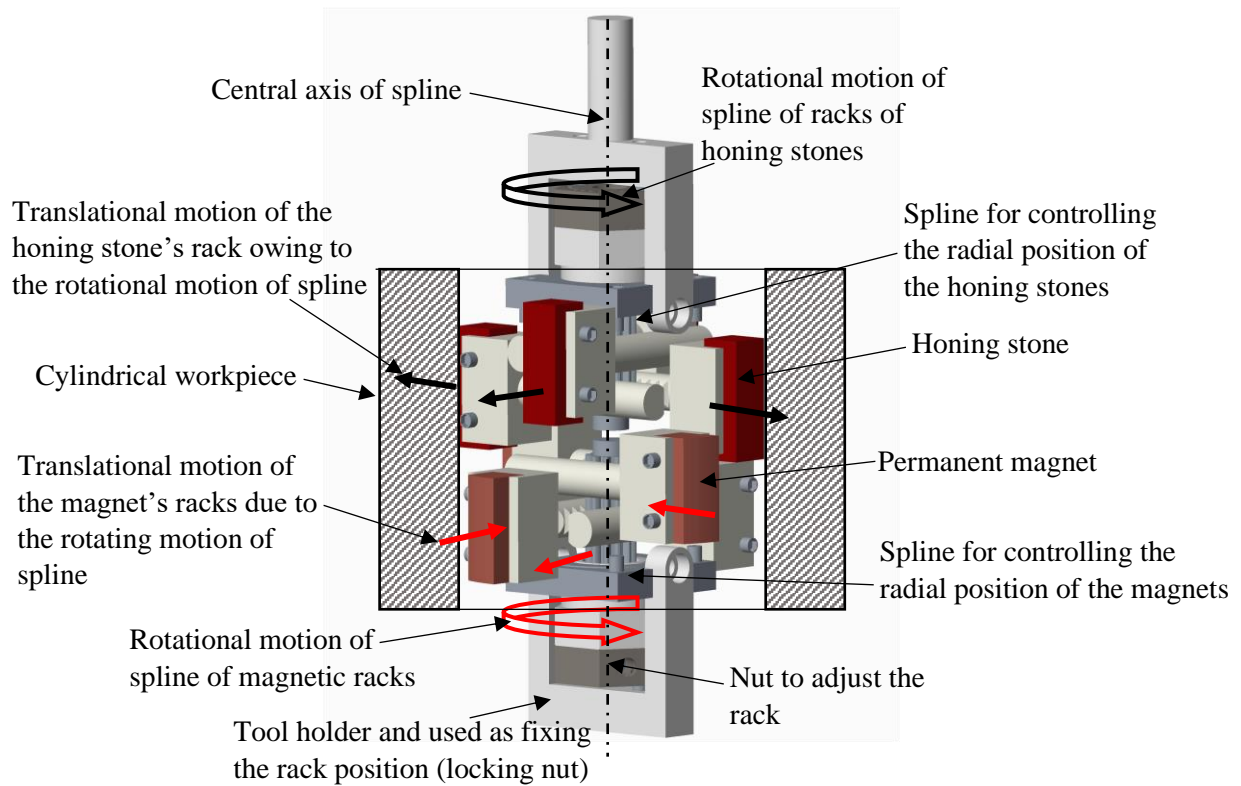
Proposed design of in-situ magnetorheological honing (MRH) tool for initial surface generation using traditional honing and final fine finishing using the R-MRH with a same single tool.
